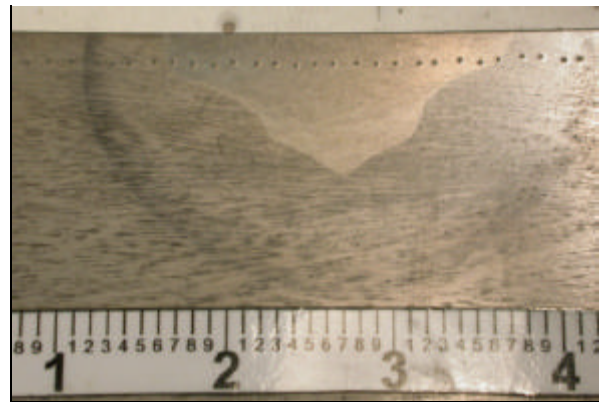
Cross section of finished GMAW robotic rail slot weld. The depth of penetration below the rail surface for this test weld was 0.875 inch.
